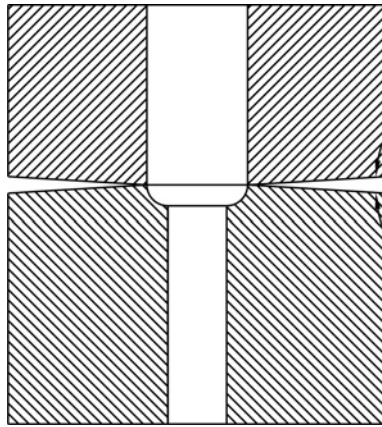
The schematic of an assembled M10 bolt die consisting of two parts
